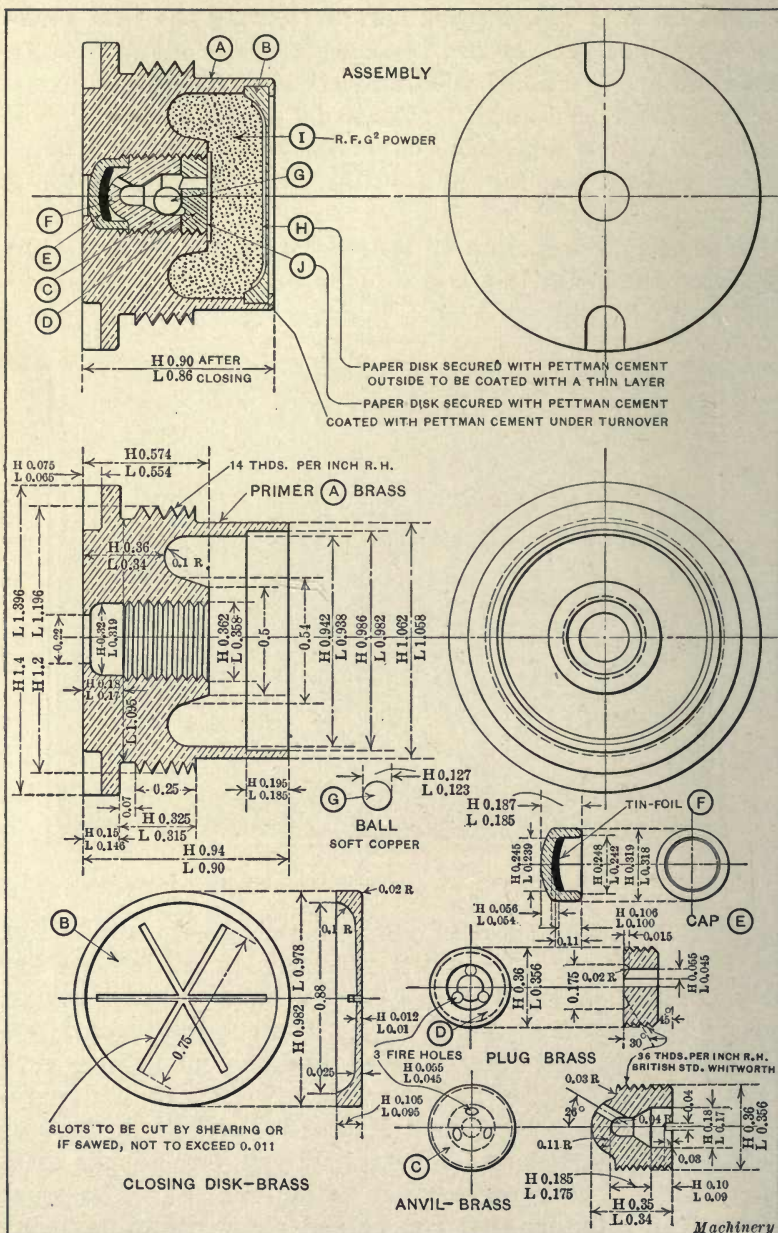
Assembly View and Details of British Cartridge Case Primer
